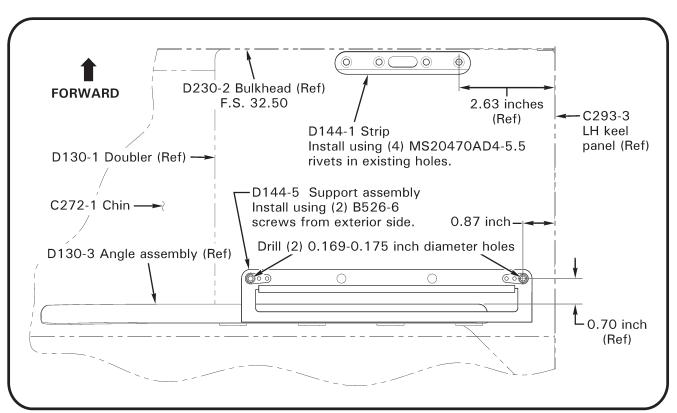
Installation dimensions for D144-1 strip & D144-5 support assembly (view looking down)
